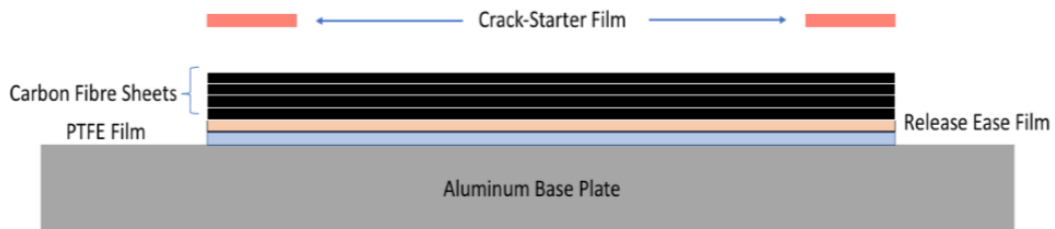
The crack-starter film placed on carbon fibres sheets
